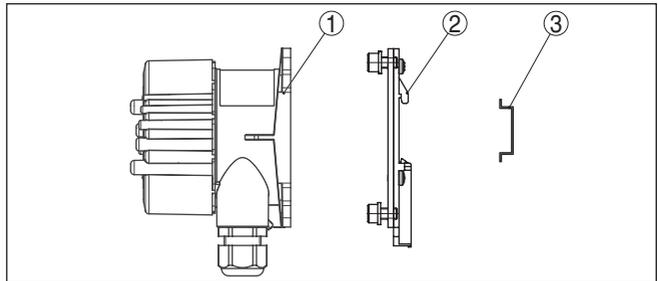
VEGADIS 82 with aluminium and stainless steel housing for carrier rail mounting
